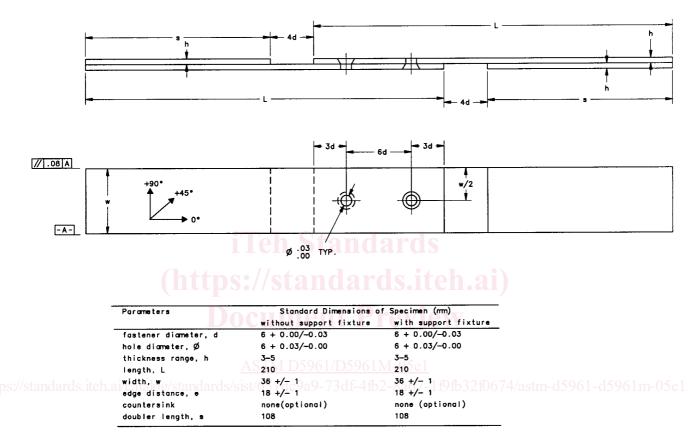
Single-Shear, Double-Fastener Test Specimen Drawing (SI)
